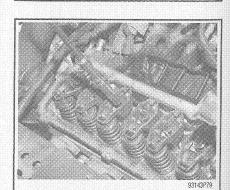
Removing the fulcrum to allow clearance to the head bolts
